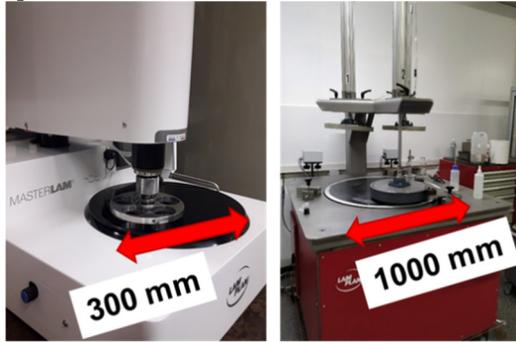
Photographs of a polishing machine MASTERLAM 1.0 (left) and a polishing machine MM 9100 (right).
